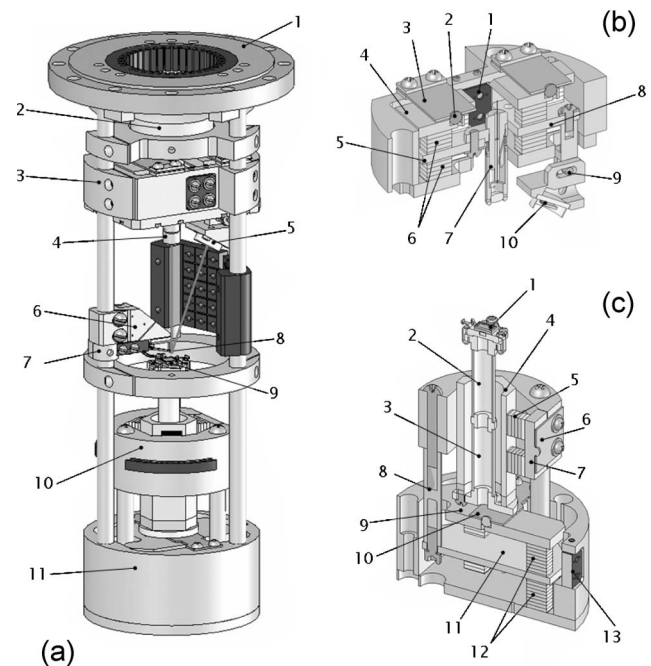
(a) LTAFM Head. (1) 4 K plate, (2) objective lens for CCD optics, (3) 2D piezomotors for laser and quadrant photodiode, (4) laser lens assembly, (5) quadrant photodiode, (6) cantilever holder assembly, (7) cantilever holder stop, (8) cantilever, (9) sample, (10) Z sample walker (11) XY sample walker. (b) Laser and quadrant photodiode piezomotor assembly. (1) Connector block, (2) ruby ball, (3) BeCu spring, (4) top plate, (5) sapphire plate for laser, (6) shear piezo stacks, (7) fiber-laser lens assembly, (8) sapphire plate for quadrant photodiode, (9) position-angle adjustment screw, (10) quadrant photodiode. (c) Sample XYZ motor stage. (1) Sample holder assembly, (2) fine-Z piezotube, (3) XY and coarse-Z piezotube, (4) sapphire prism, (5) shear piezo stack, (6) BeCu spring, (7) side press plate, (8) Z walker support, (9) XY walker top plate, (10) BeCu spring, (11) sapphire plate for XY walker, (12) shear-piezo stacks for XY walker, (13) connector block.
